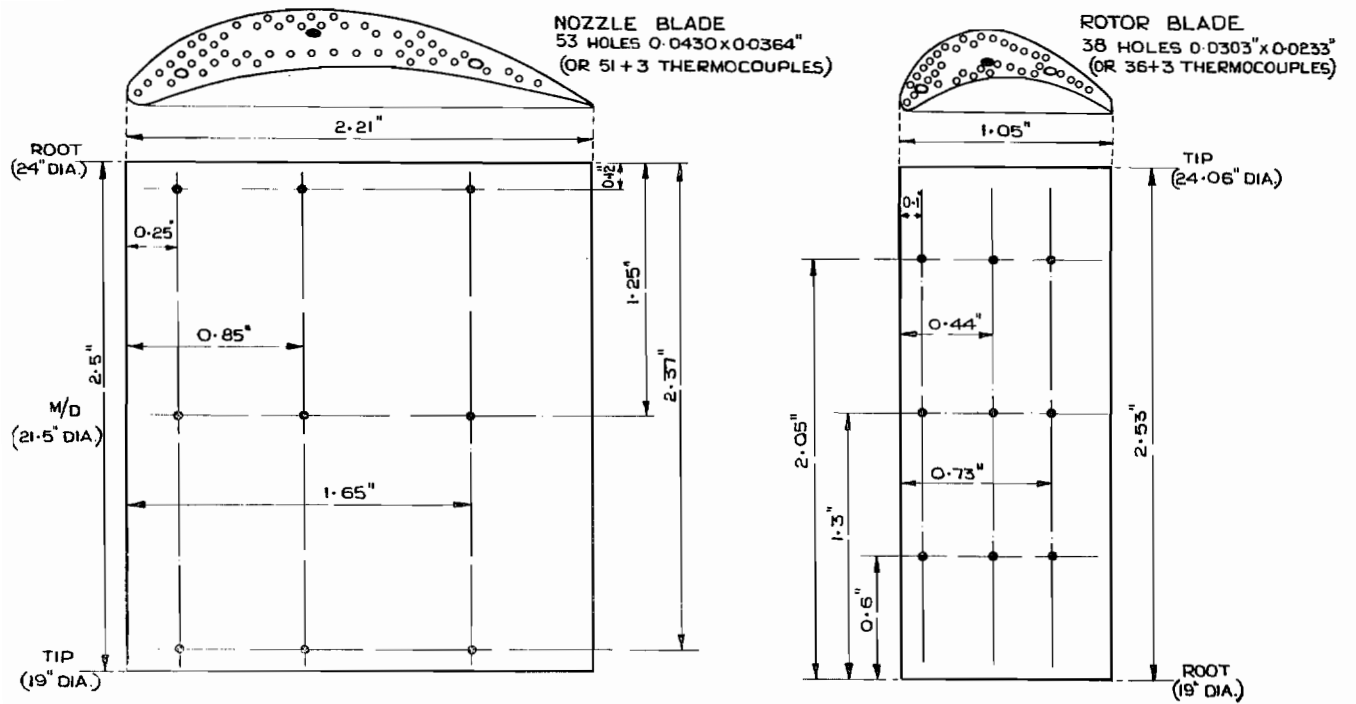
Location of thermocouples in nozzle and rotor blades.
